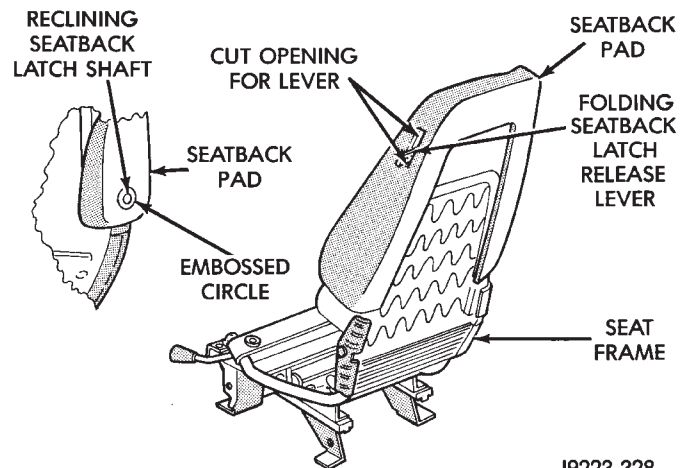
Seatback Pad Installation—Wingback Seat
